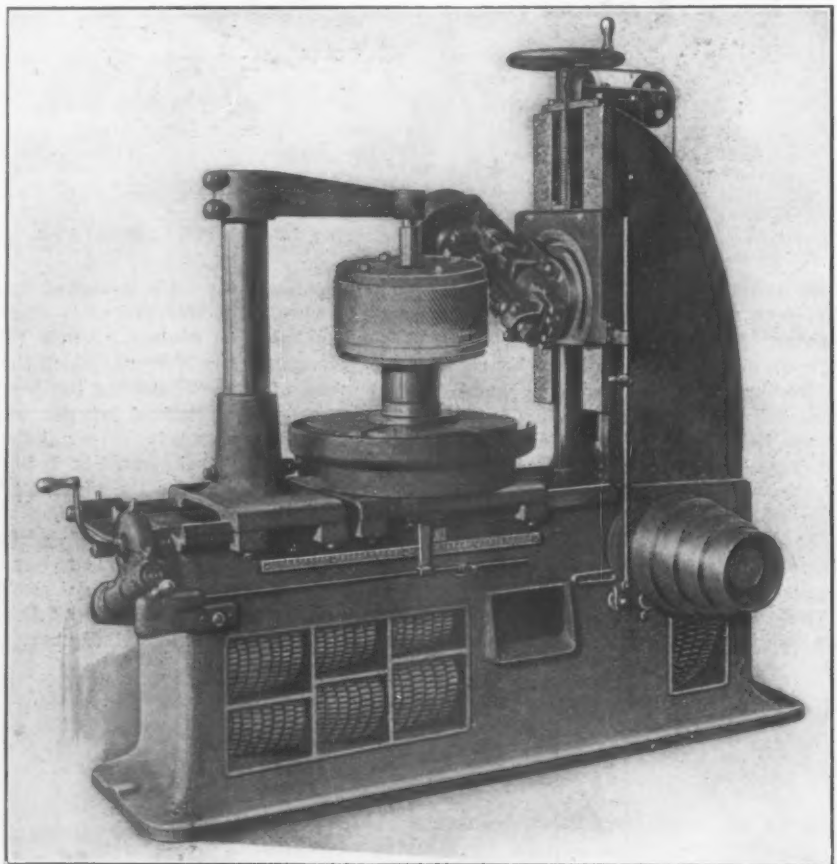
View of the Driving Side of the Gould & Eberhardt Gear Generator.
